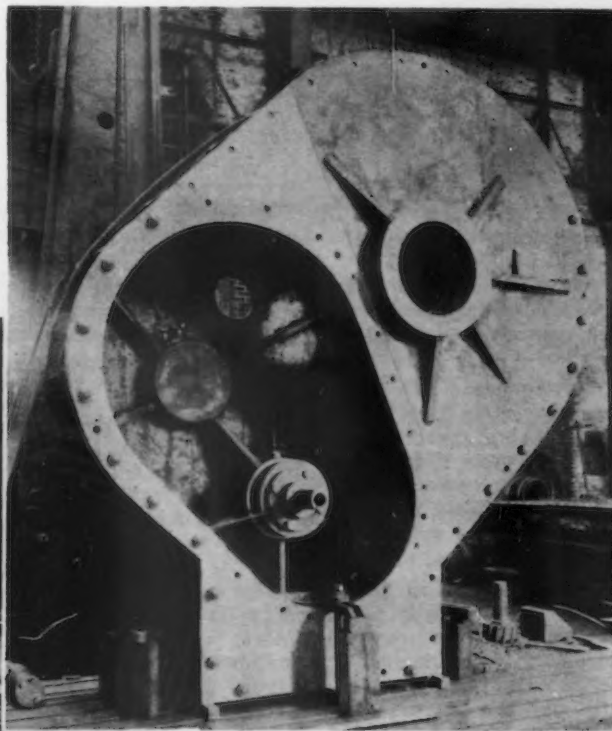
Special 16-ton gear case featuring oil-tight welded construction. Side plates are $1\frac{1}{2}$ -in. thick and cover plates, 2-in. thick.
